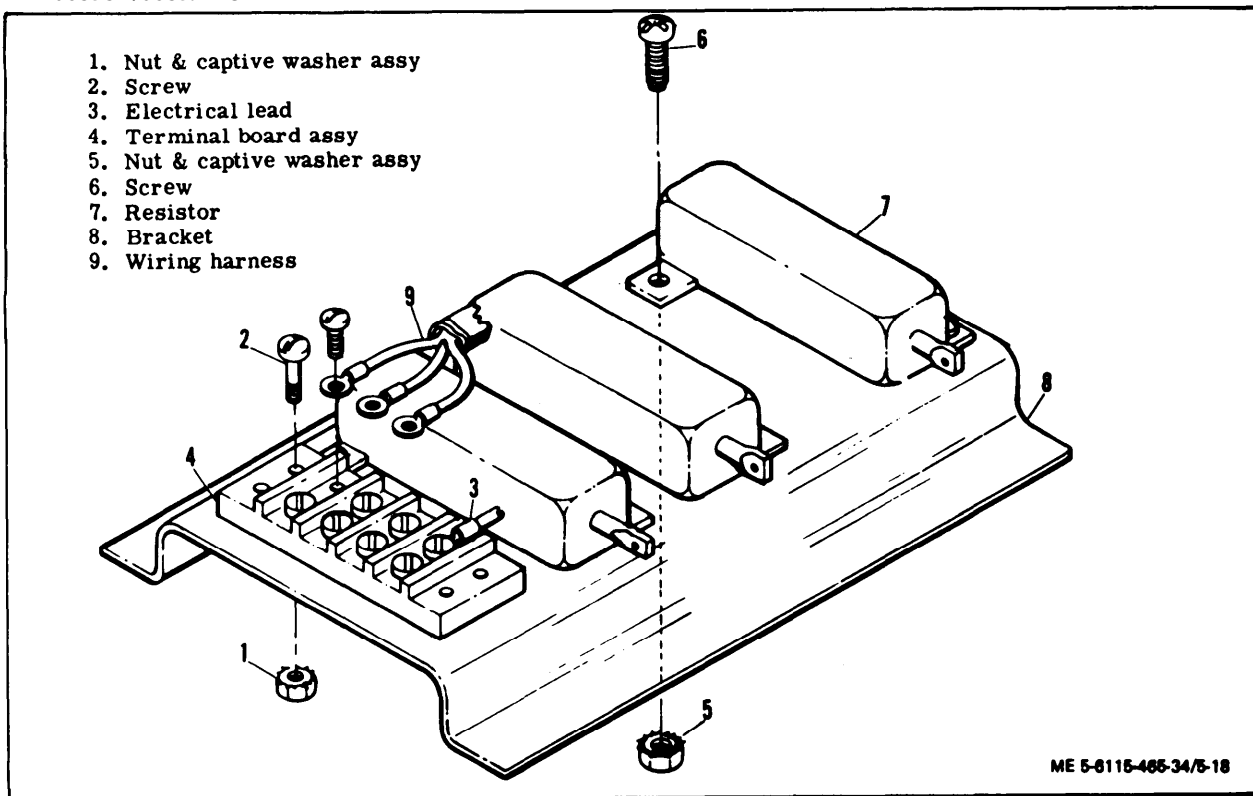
Tactical Relay Resistor Assembly, Exploded View
